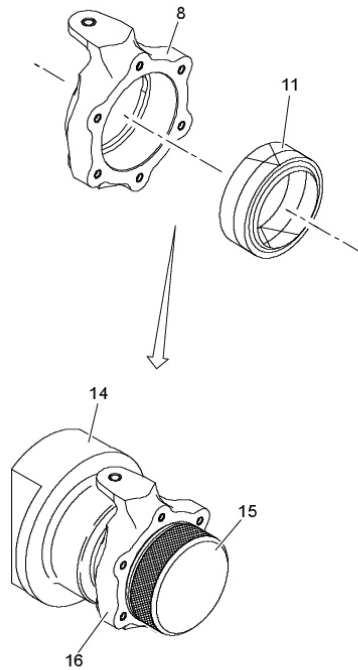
(sheet 4 of 4). Housing and slider group - Disassemble procedure (Sleeve assy P/N 109G6430A03)
